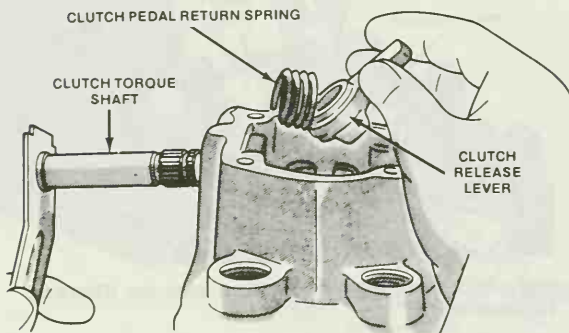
Removing the clutch release lever assembly. (Chrysler Corporation)
